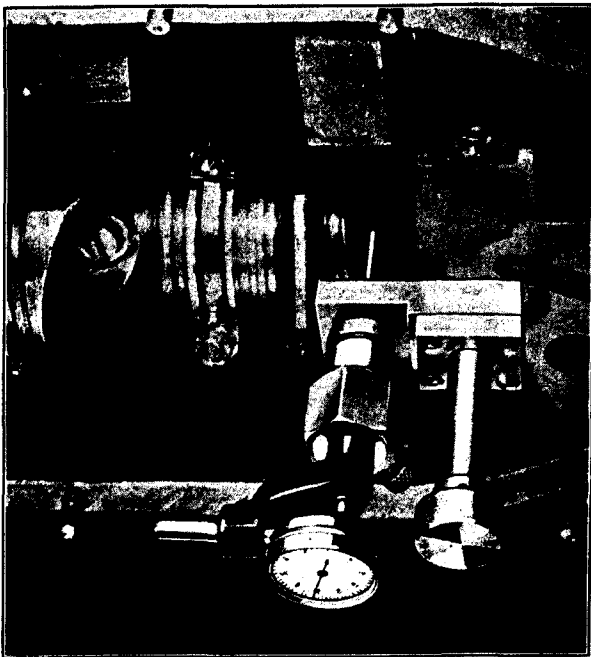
Indicating Front Main Bearing. Indicator 196-B and Holder 65530 with Adapters A and B
